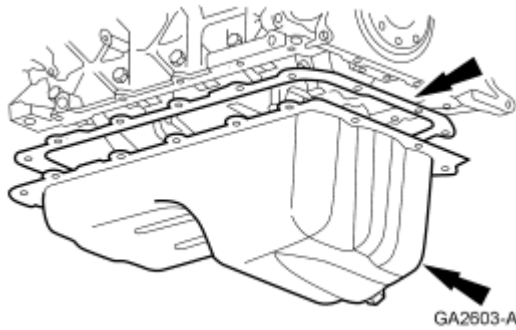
Positioning New Oil Pan Gasket And Oil Pan
